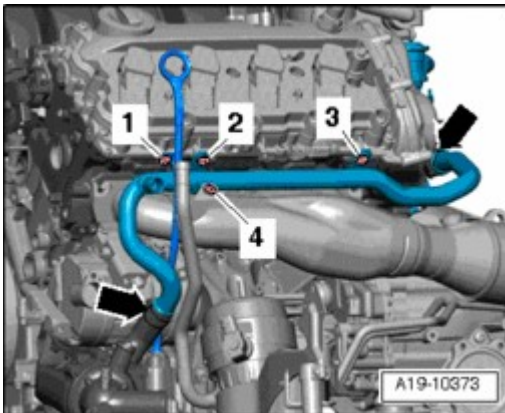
Removing Oil Dipstick Guide Tube Bolt, Guide Tube, Bolts & Coolant Pipe From Coolant Hoses
